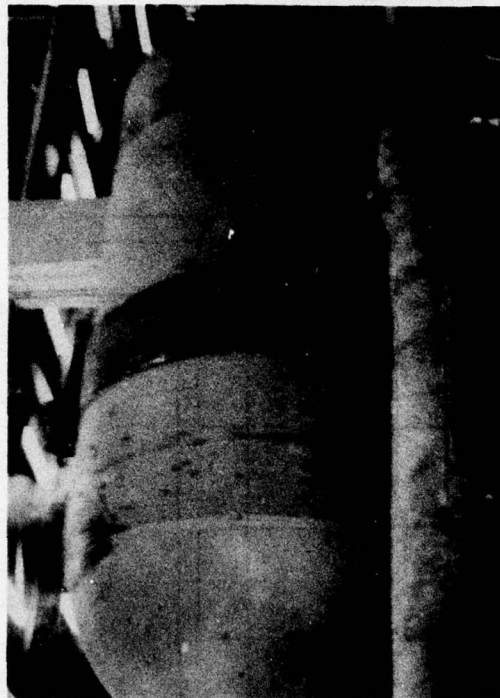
Photograph of Lower Head Welded to Lower and Middle Cans
